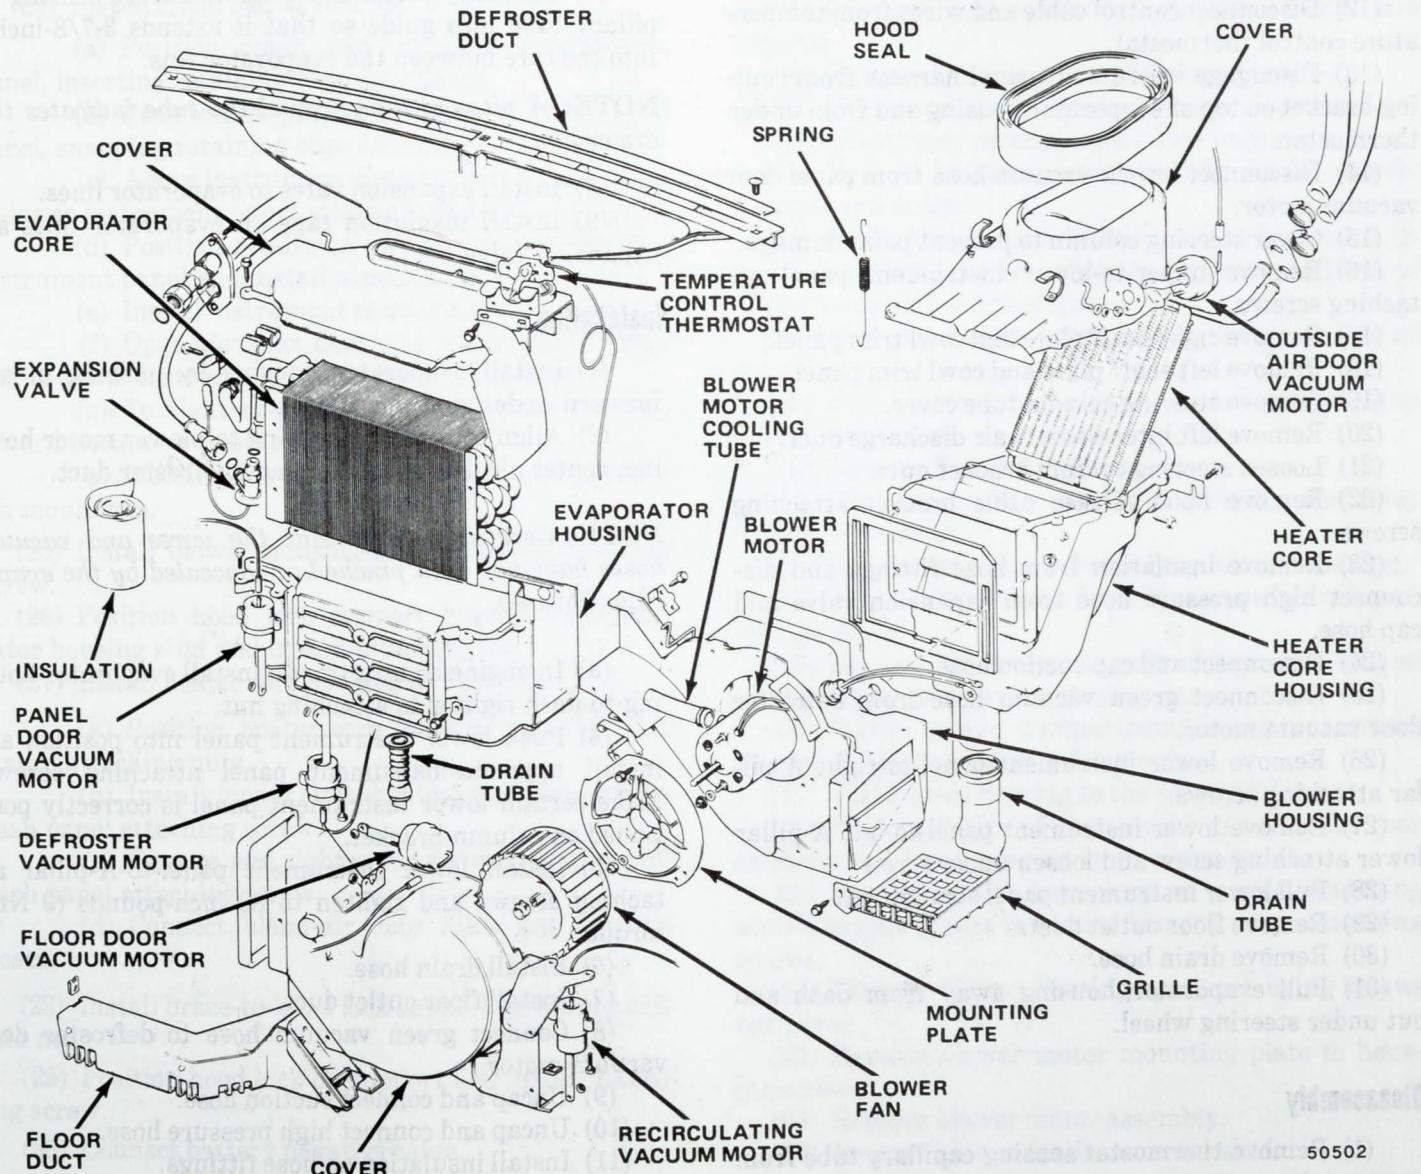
E-31 Evaporator Housing, Core, Blower Motor Housing, and Heater Core Housing Components
